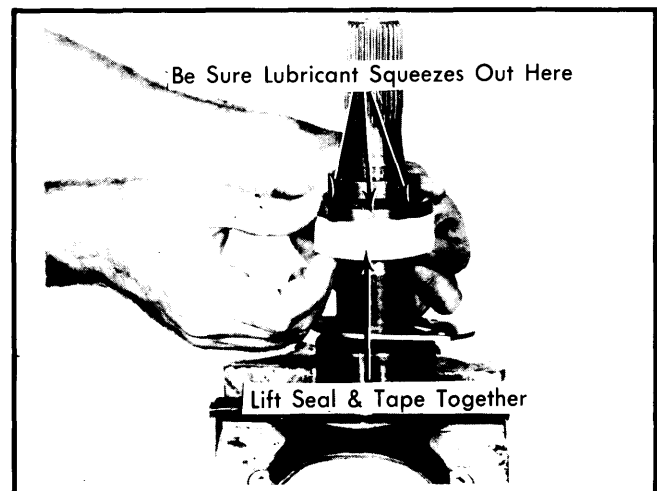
Lubricating Bearing Installed on Axle Shaft
